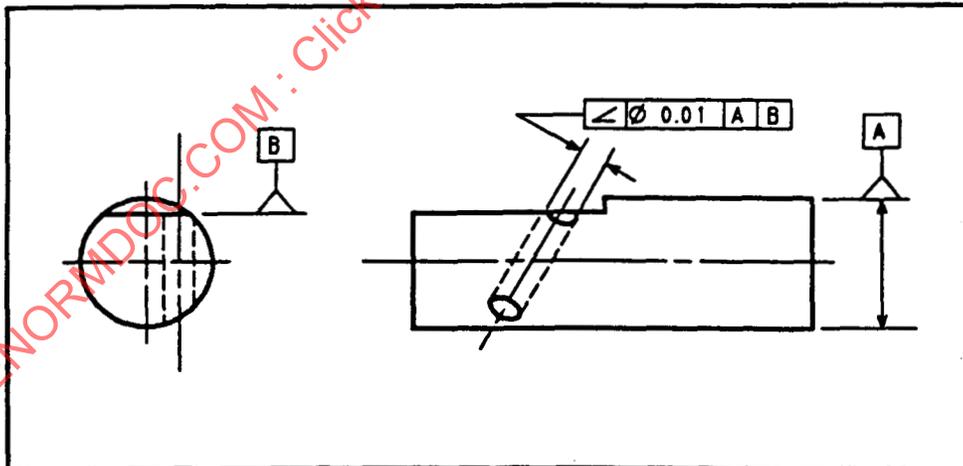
CYLINDRICAL ANGULARITY OF AN AXIS; PRIMARY DATUM AXIS; SECONDARY DATUM PLANE
